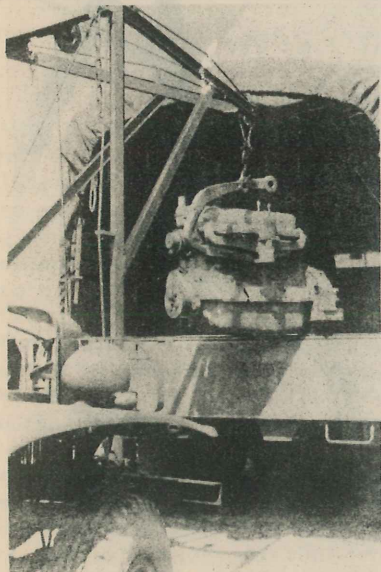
The Little Hoist and the engine hook swinging a valve-in-head engine.
